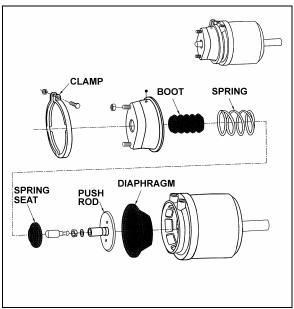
TAG AXLE OR DRIVE AXLE BRAKE AIR CHAMBER
